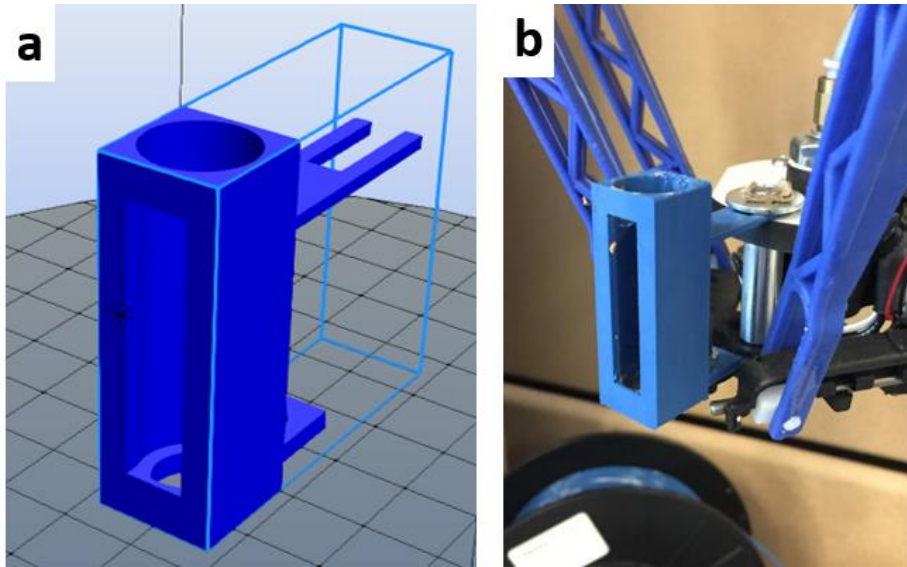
Images of (a) CAD design of 3D paste holder and (b) actual 3D printed syringe holder mounted at the print head.
